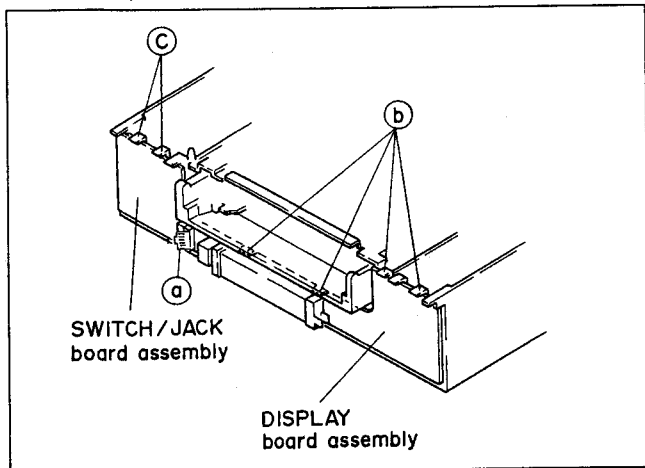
DISPLAY board assembly and SWITCH/JACK board assembly
